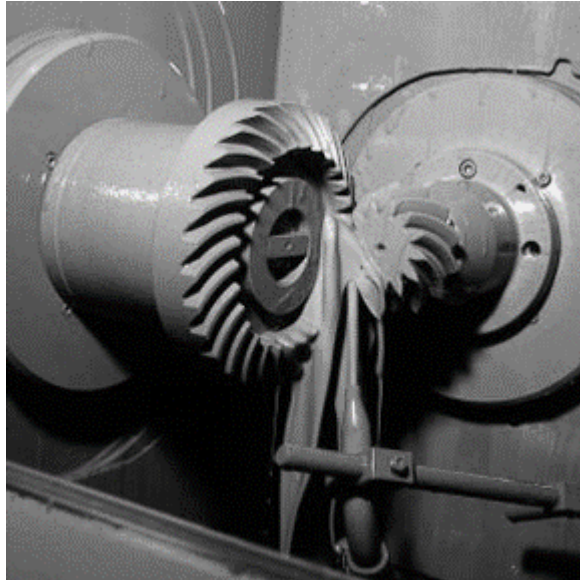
Lapping of helical gears using an industrial lapping machine with a lapping fluid [15].
